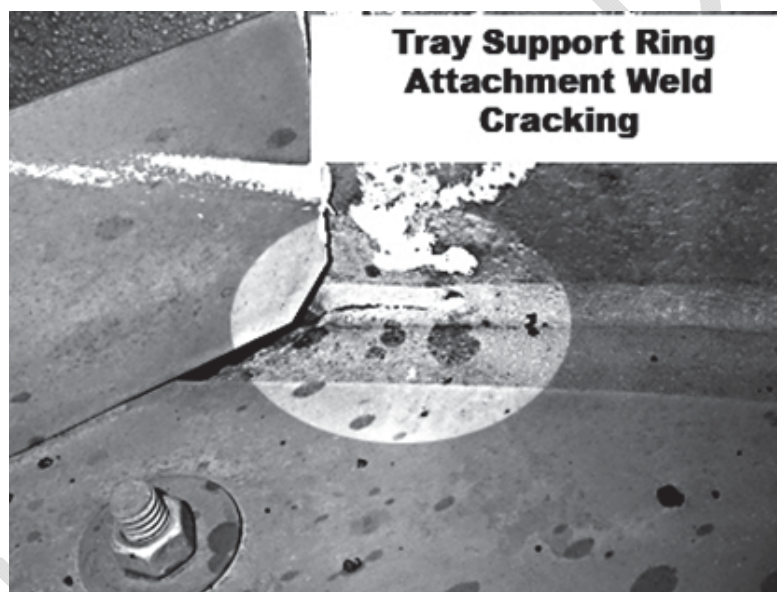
Cracking of Ring Attachment Weld
